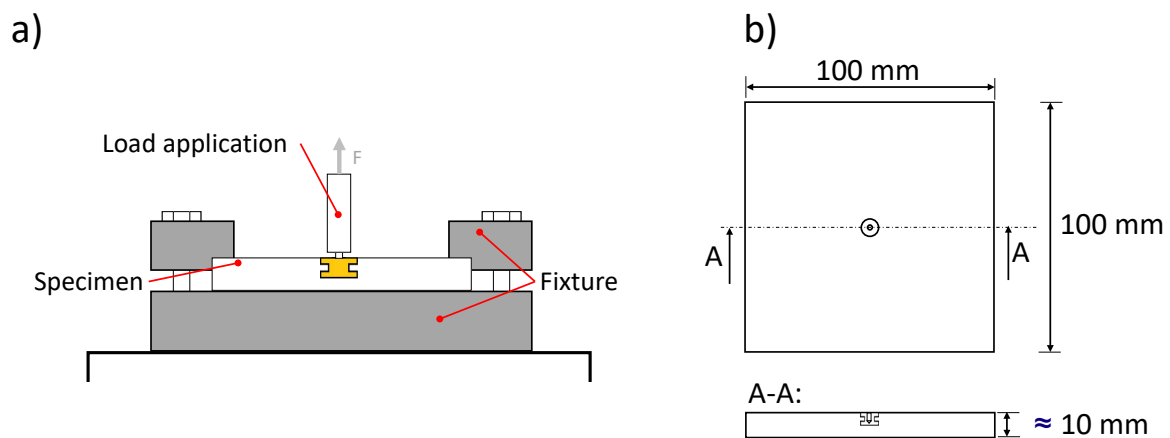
a) Pull-out test setup (schematic) and b) dimensions of the test specimens.
